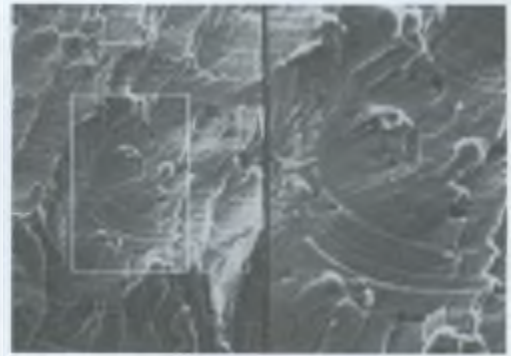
Typical fatigue-fracture surface on metals, showing beach marks. Magnification: left, 500 \times ; right, 1000 \times . Source: Courtesy of B.J. Schulze and S.L. Meiley and Packer Engineering Associates, Inc.
